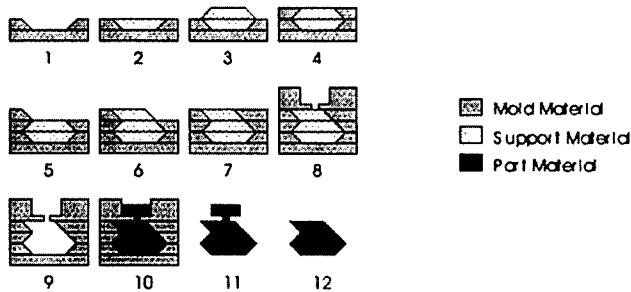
Schematic representation of the Mold SDM process: the mold is constructed layer by layer. After that, the support material is dissolved and the ceramic part is gel-cast.
